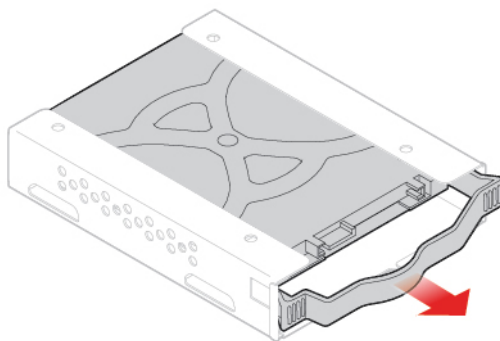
Removing the inner 2.5-inch secondary storage drive bracket
